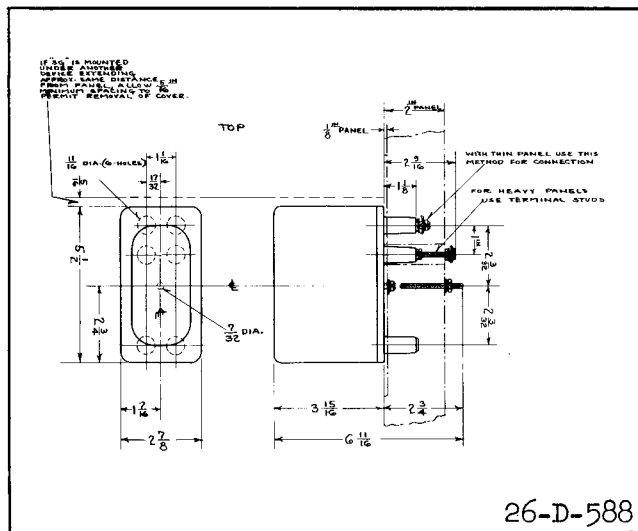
Outline & Drilling Plan for the Type PS-4 Auxiliary Unit in the Projection Molded Case.
